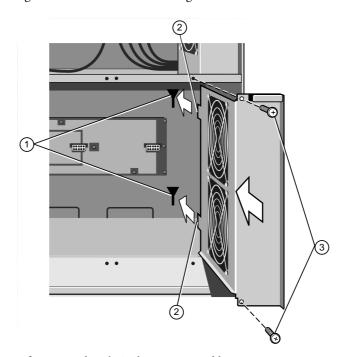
Refitting Hard Disk Cooling Fan Assembly
